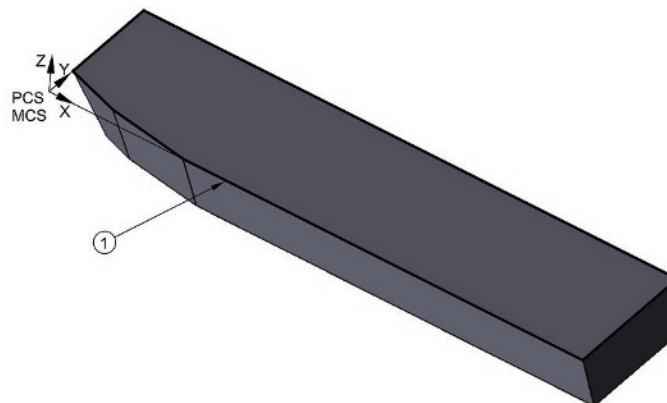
Data exchange model of reaming insert with one cutting edge and double plug chamfer
